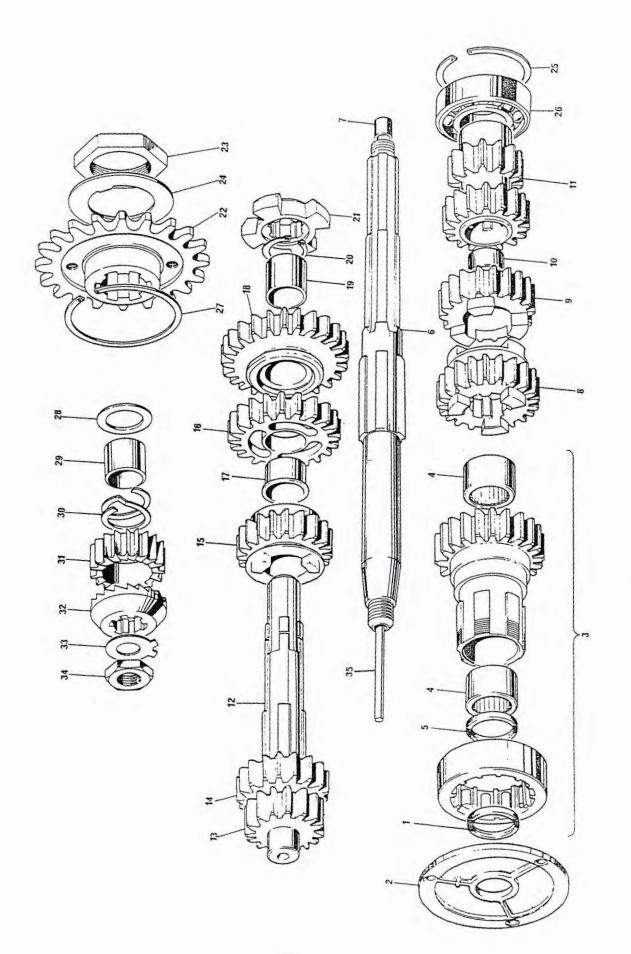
GEARBOX SHAFTS AND GEARS (S SPEED)
